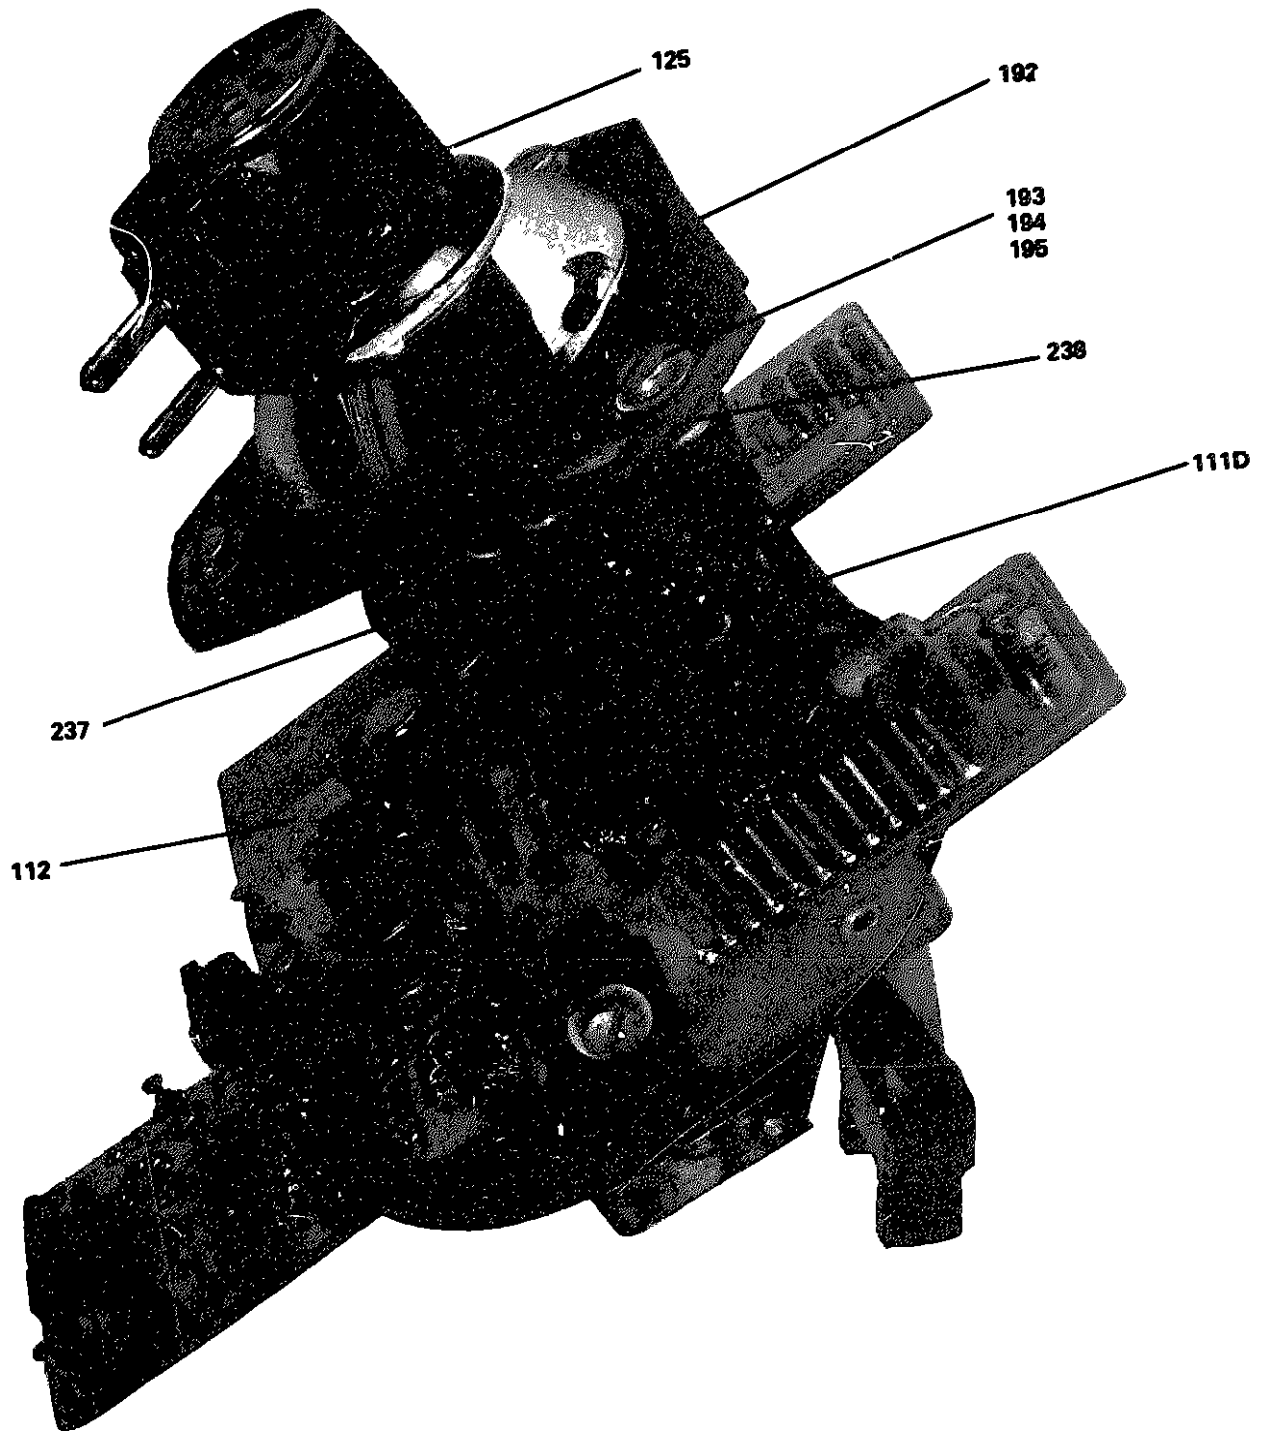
Read Head Optical Assembly 1A7A2A2 (Sheet 5 of 8)
